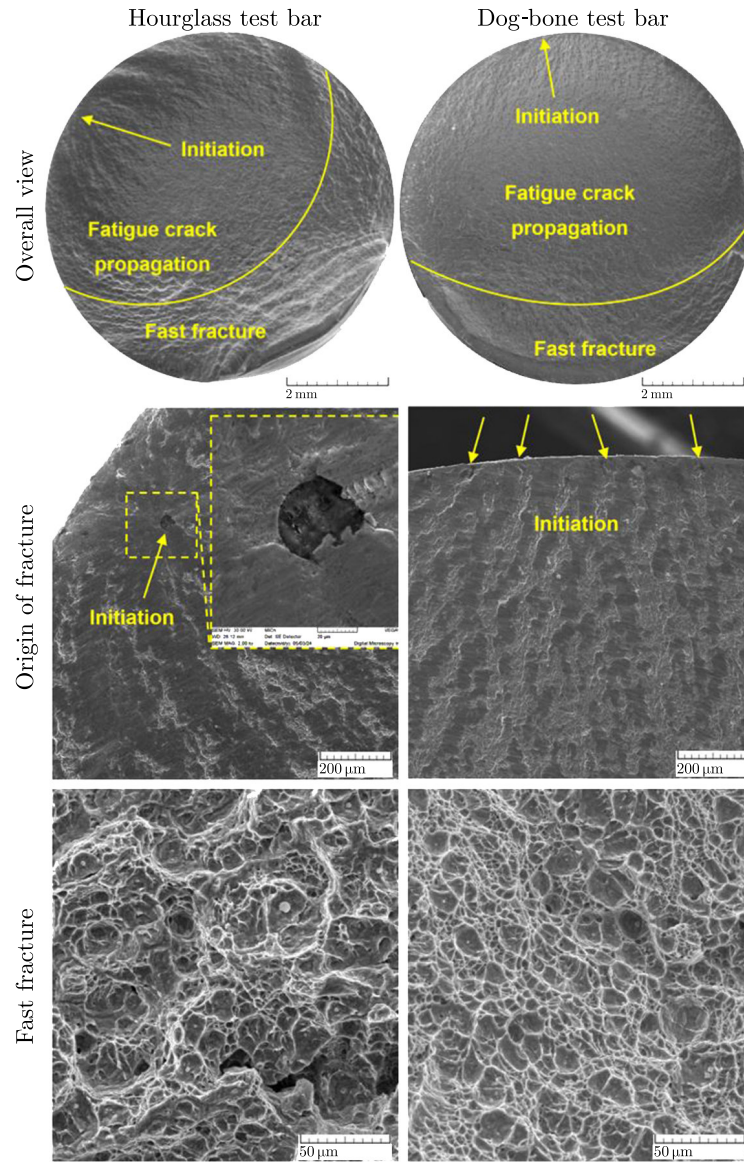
Fractographic analysis of fractured surfaces after fatigue testing of test bars with different geometry.
